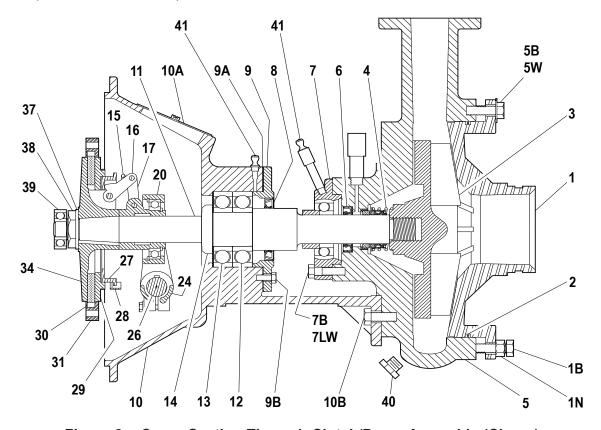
Cross-Section Through Clutch/Pump Assembly (Clump)
